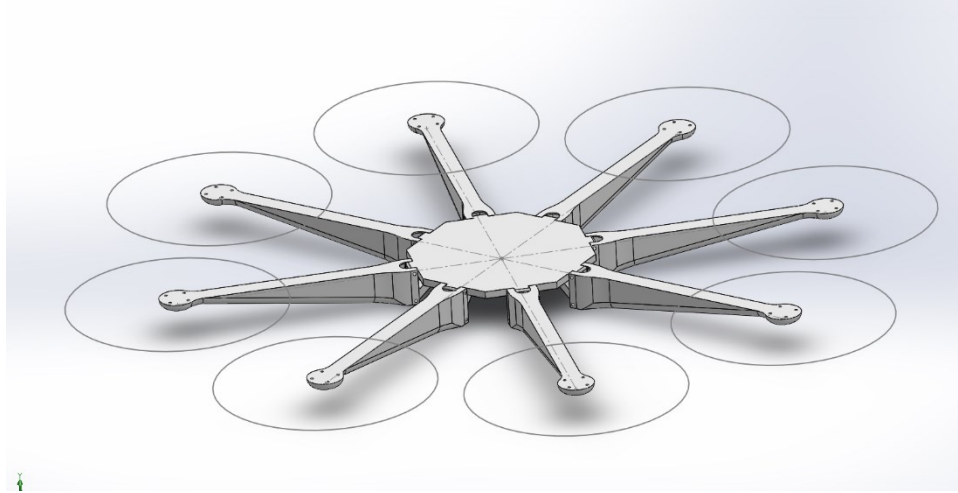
CAD OCTOCOPTER ASSEMBLY FOR LESSON
